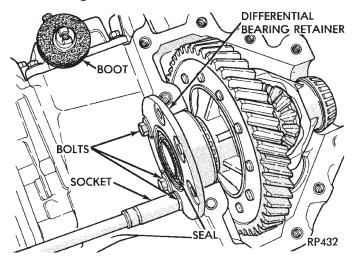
Remove or Install 3 Differential Bearing Retainer Bolts
